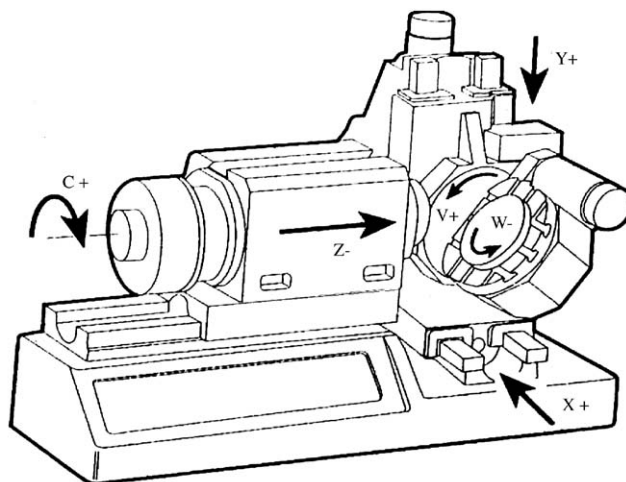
General arrangement of the Proteo D/94 5-axis machining centre.
